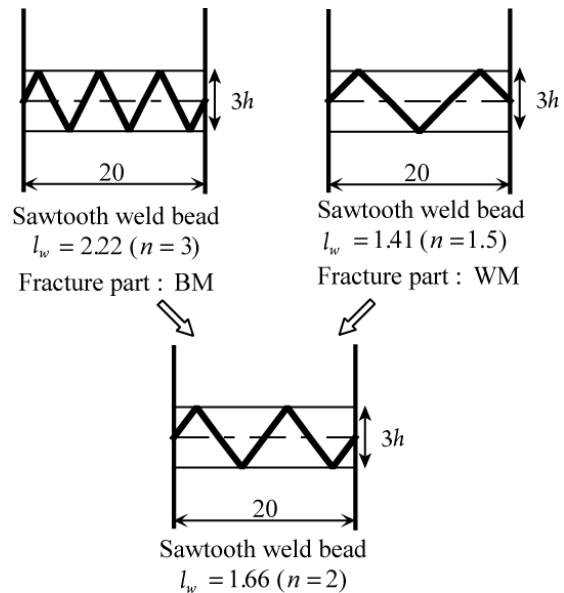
Sawtooth weld bead pattern of lap joint
